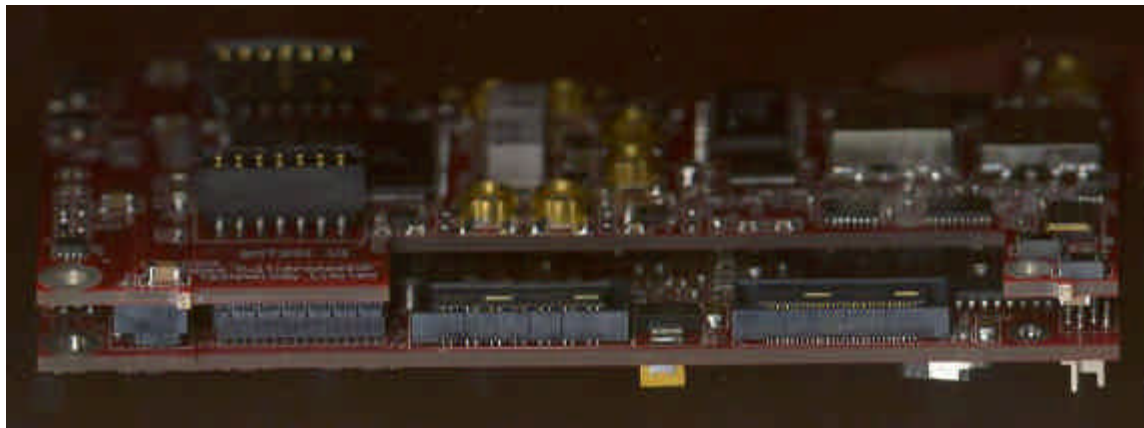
Side view of SMT391-VP (No Heat Sinks, Rev1 PCB).
